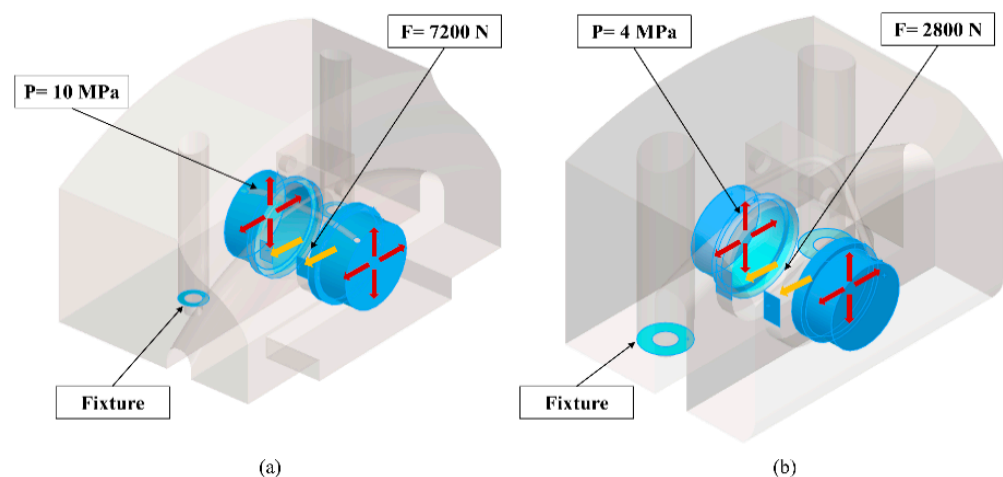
The design space, the loads, and the boundary conditions of the housings: (a) Housing of the front caliper, (b) Housing of the rear caliper.
